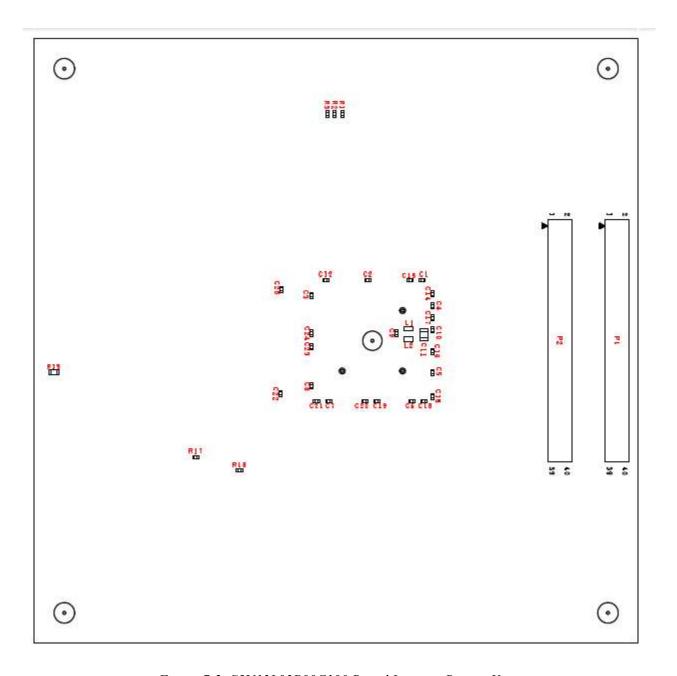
S5U13L03P00C100 Board Layout - Bottom View
